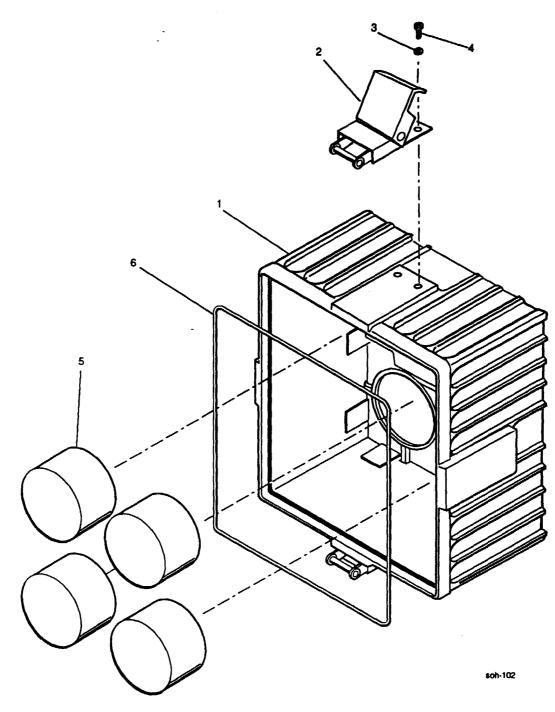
Disassembly of Battery Box Cover Assembly
